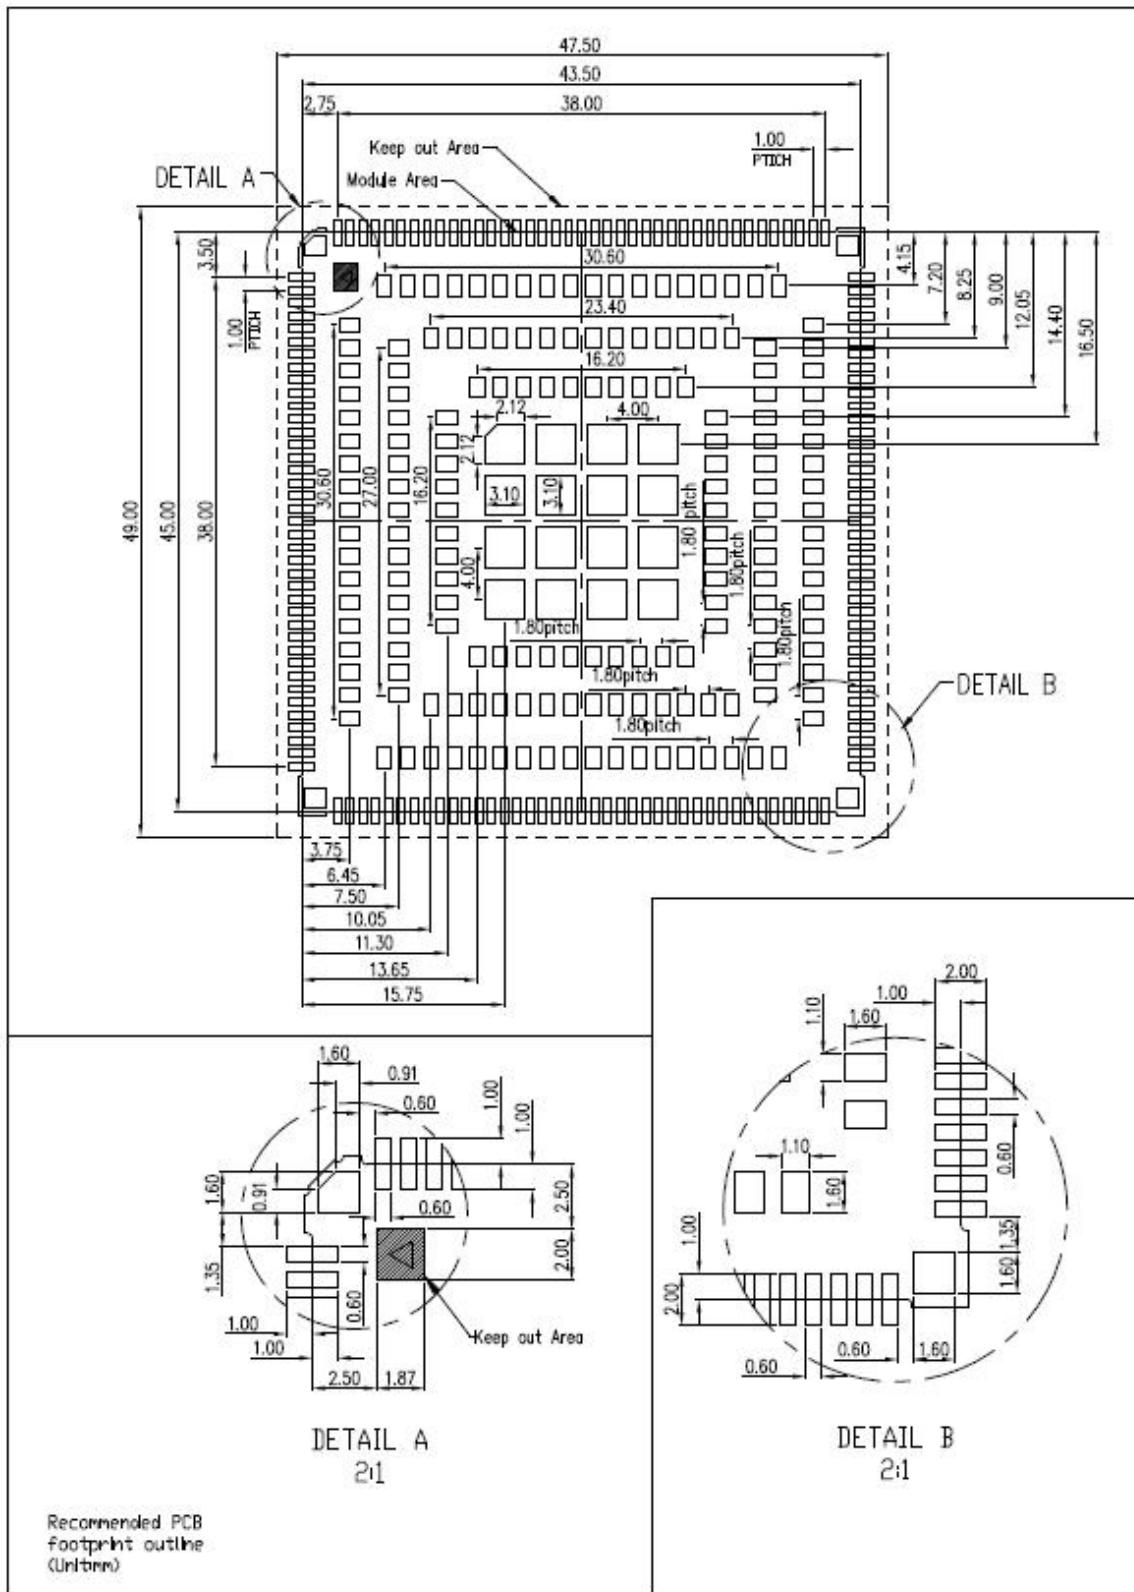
Recommend Physical Outline Drawing (Unit: mm)
